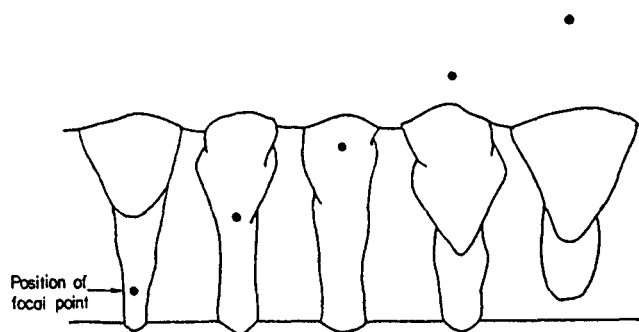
Schematic diagram of the influence of focal position on weld bead shape for CO_2 laser welding of stainless steels. Power = 5 kW and speed = 16 mm/s. For welds made in 6 mm thick sheet, the optimum focus was ~ 1 mm below the surface⁽¹⁶⁾.
